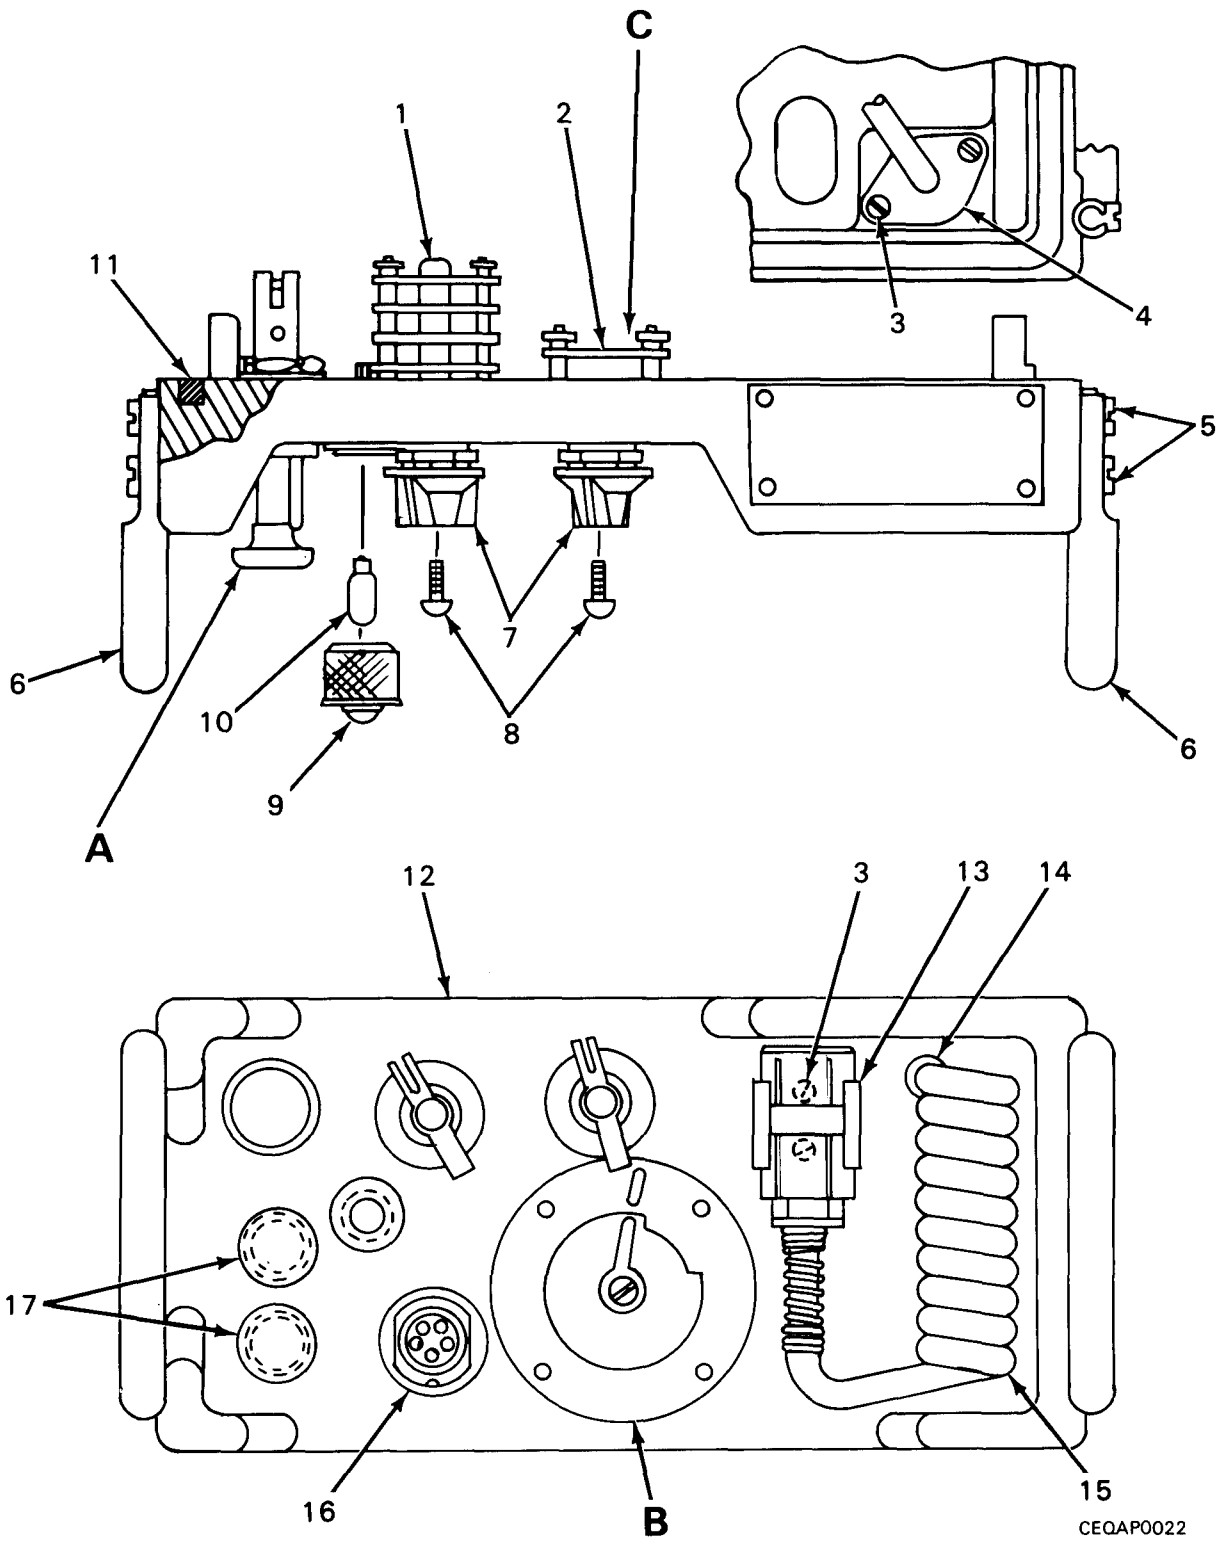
Panel Assembly (AN/GRA-39) (Sheet 1 of 2)
